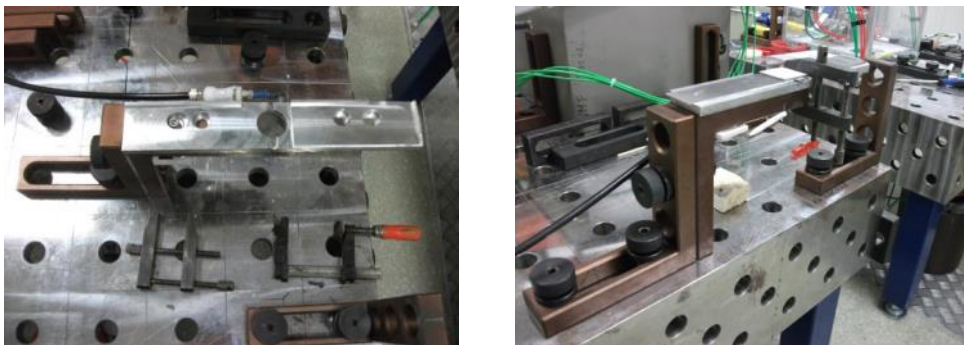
Fixture system for welding process with the black pipe for the bottom gas flow (left) and the mechanical clamps on the Mg alloy plates
